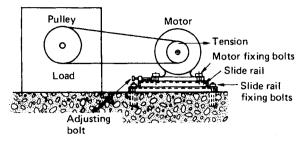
Vee belt adjustment of slide rail mounted motor.
